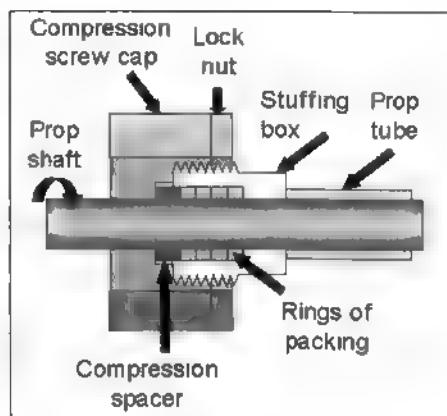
The layout of a typical marine prop-shaft stuffing box; bearings not shown.
